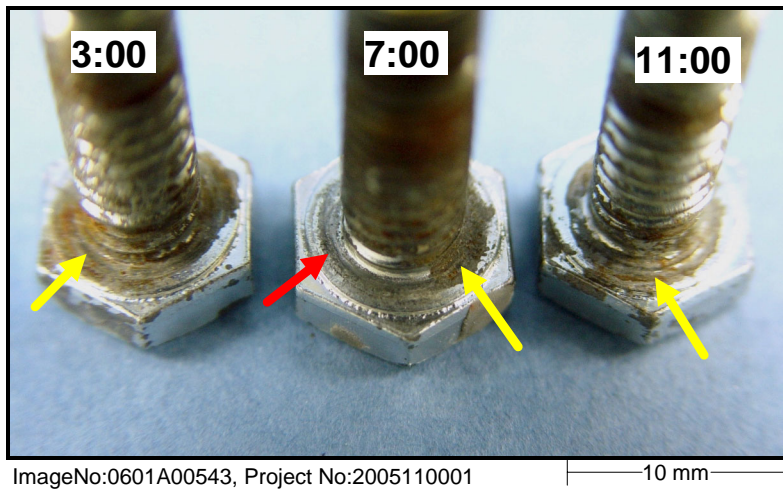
The lock washer contact faces on the accident pump housing bolts.
